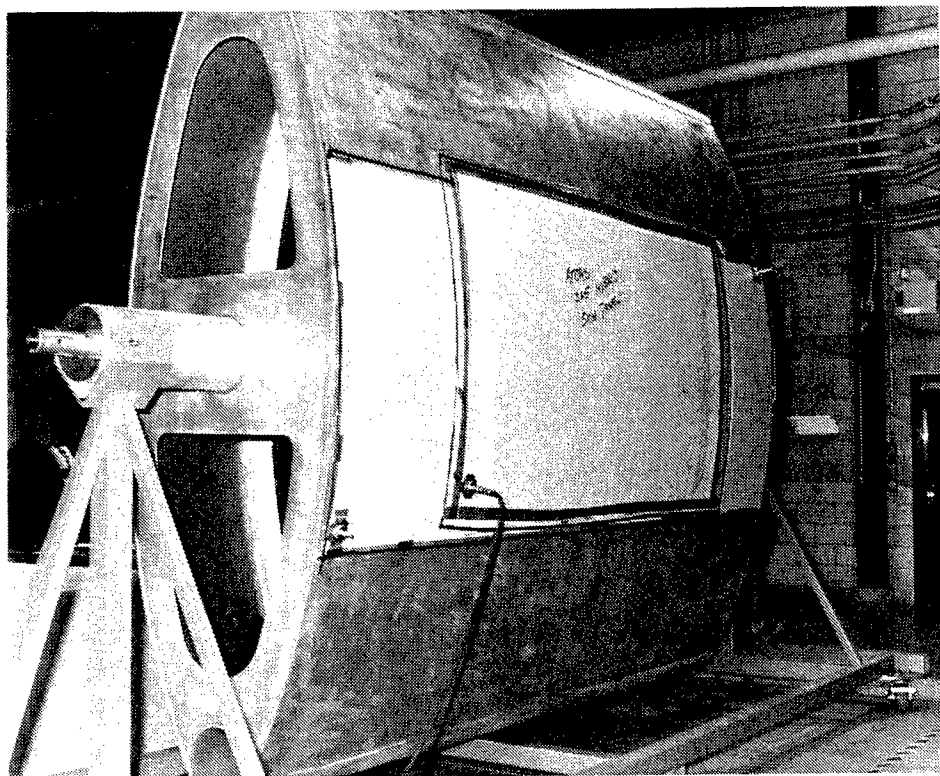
Comparison of the Global and Local Panel Assembly Tooling
